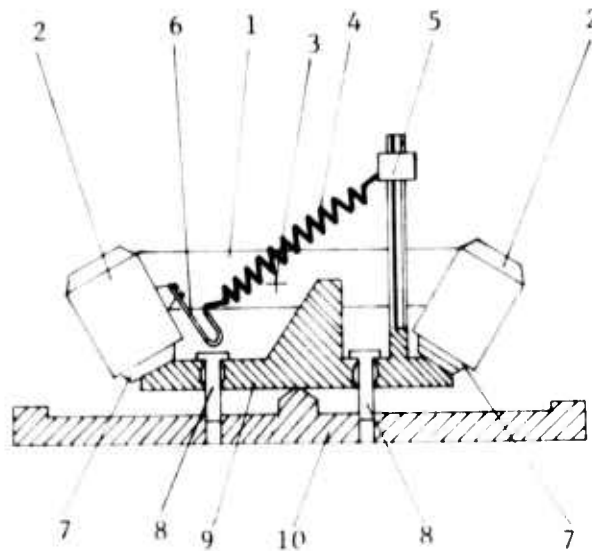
Schematic drawing of the S5S seismometer [1]
